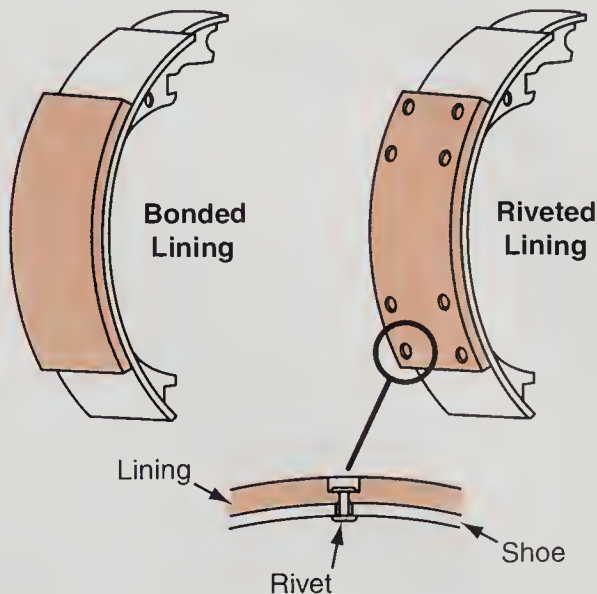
Drum brake lining also can be bonded or riveted to the metal shoe.
